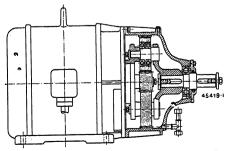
Geared motor with PA planet gear for speed ratios up to about 1 to 10.
